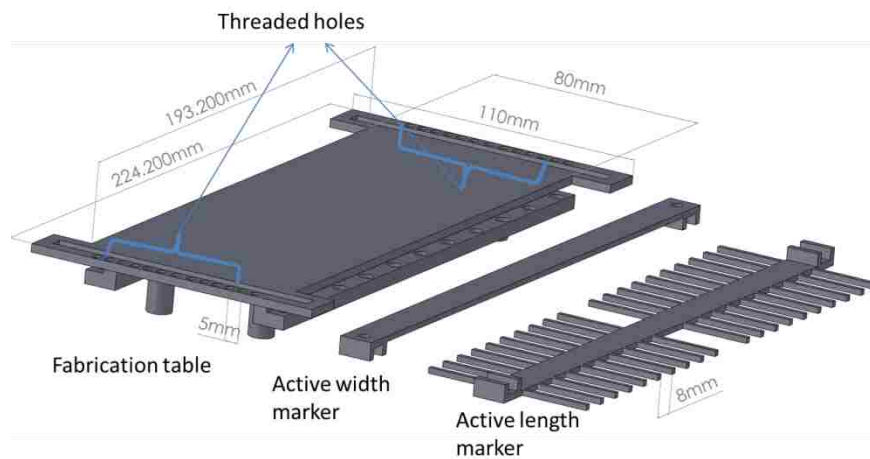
CAD views of 3D printed tools used to create DEAP composite configuration. The fabrication table has threaded holes to hold the marking tools. The dimensions of the tools are based on the size of the built actuators in this thesis.
